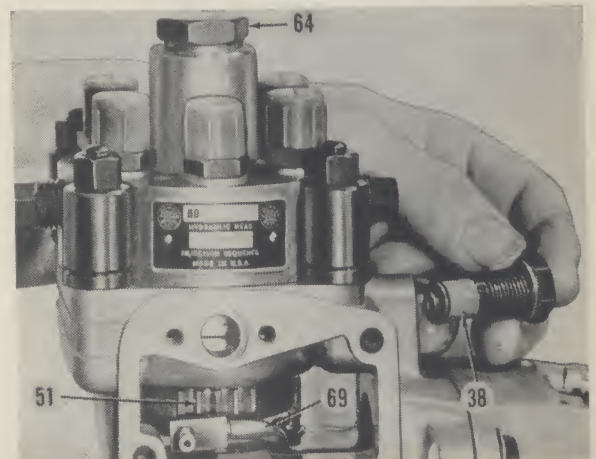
To remove hydraulic head from injection pump, remove timing window and control arm unit from surface "CU" and oil filter (38—Fig. 0482) from pump body. Rotate engine crankshaft until marked tooth of plunger gear (51) is in register with "O" mark or arrow on window ledge then remove head nuts and lift off as shown.
